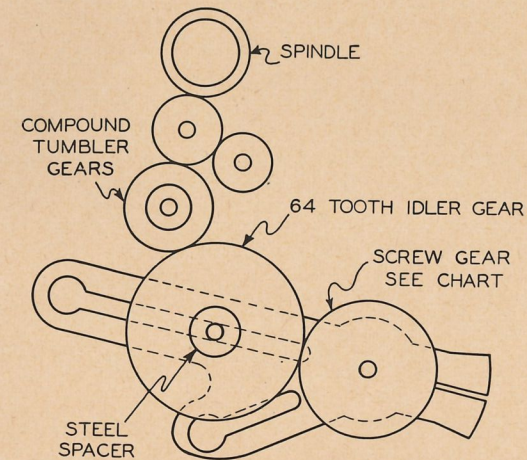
Gear set-up for 18 through 32 threads per inch.
